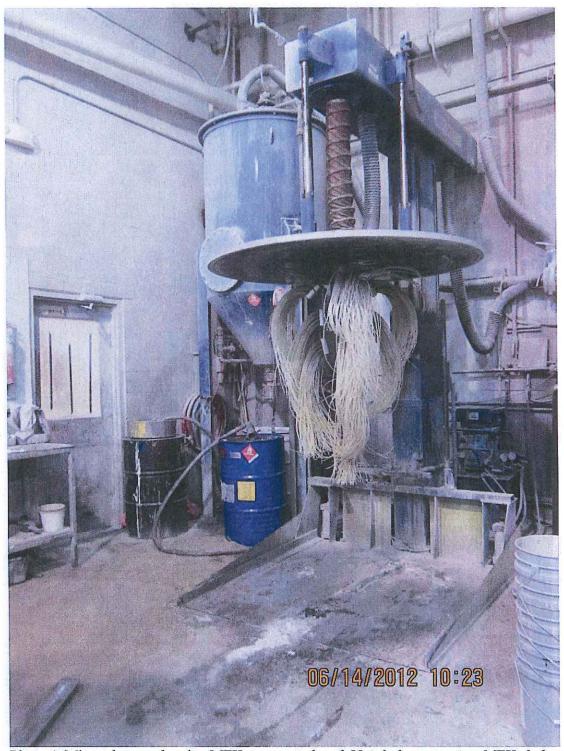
Mixer cleaner, showing MEK storage tank and 55-gal. drums to store MEK sludge.
